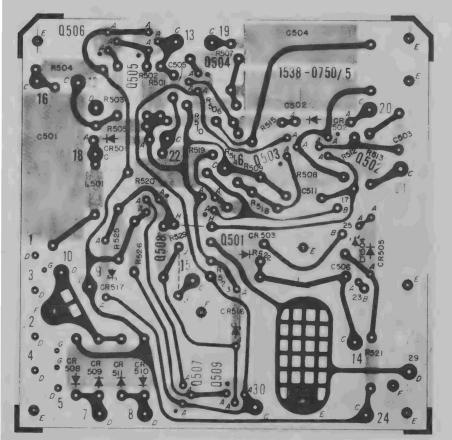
Power supply etched-board assembly. (Complete assembly is P/N 1538-2751).
